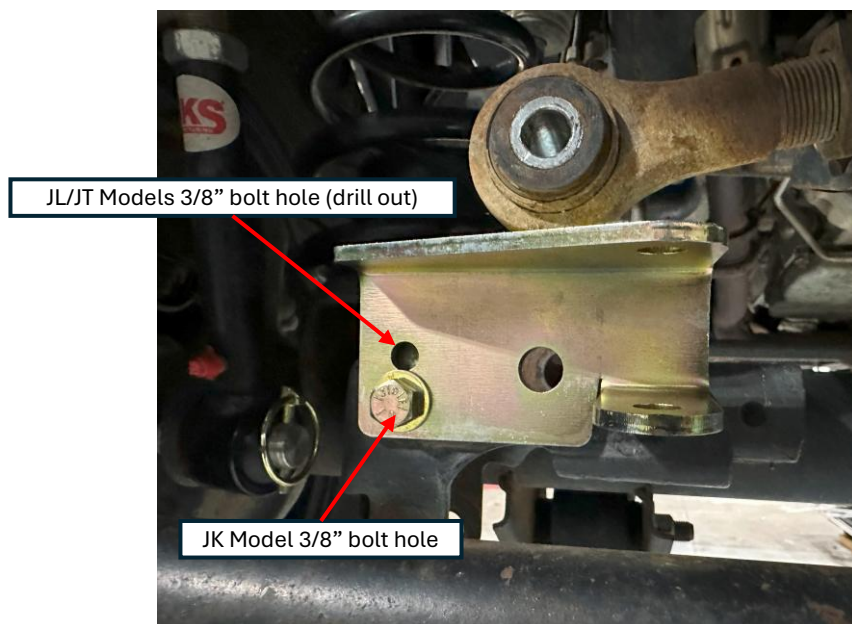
3/8" bolt with washer, lock washer, and nut installed, with track bar bolt hole aligned
